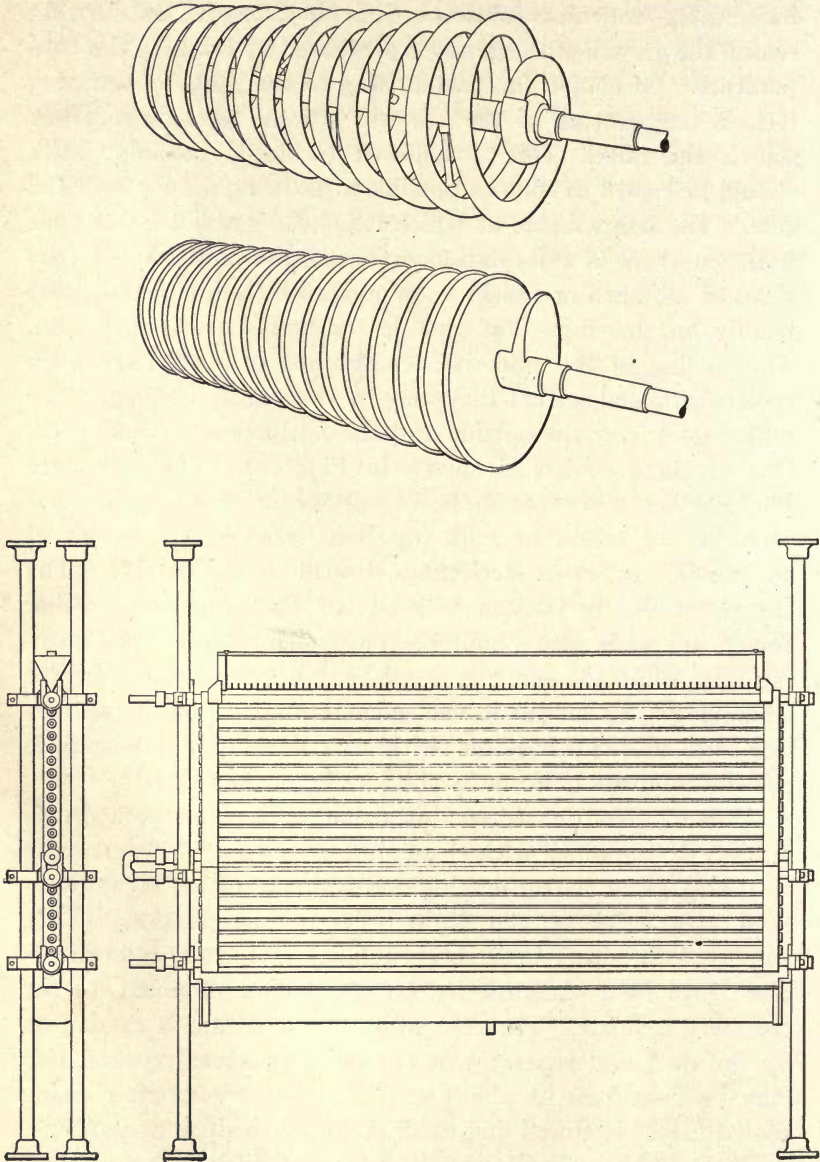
Spiral Coil, Disc Coil and Tubular Cooler of Creamery Package Co.
